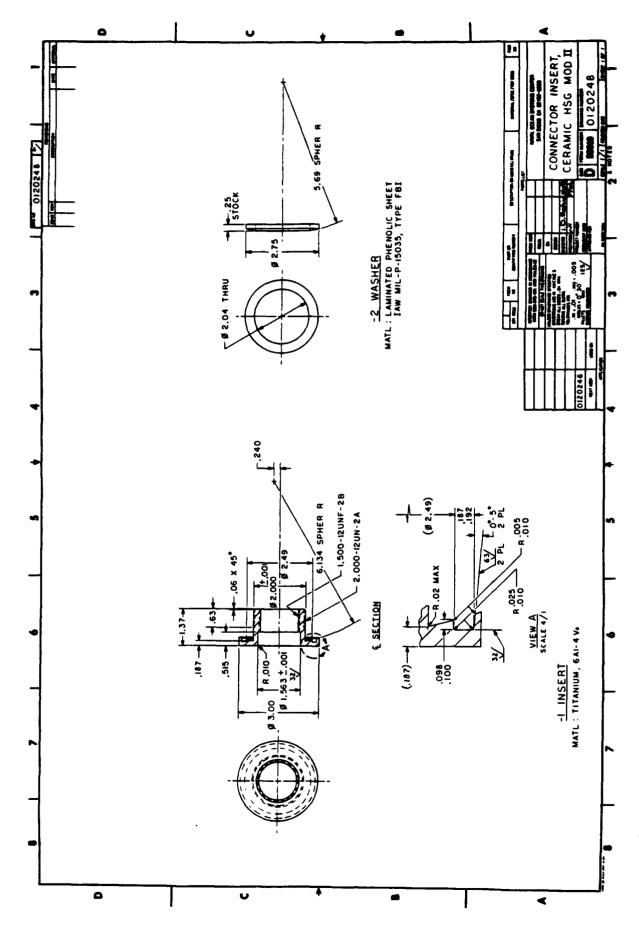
Connector insert (Revision 0) without phenolic bearing pad for Mod 2 hemisphere that initiated cracks at the edge of penetration.
